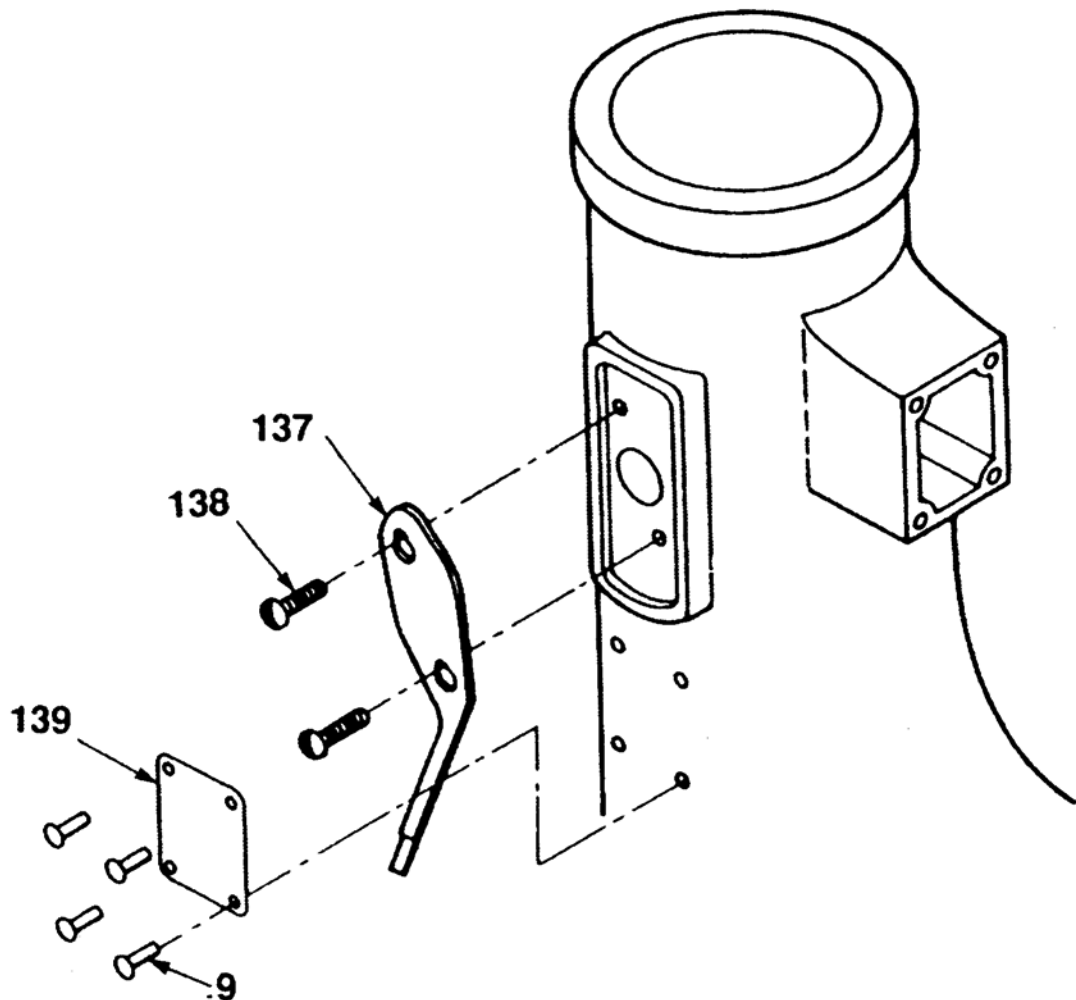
EXPLODED ILLUSTRATION OF GAGE AREA FOR 126AMJ, 132AMJ, AND 144AMJ JACKS
